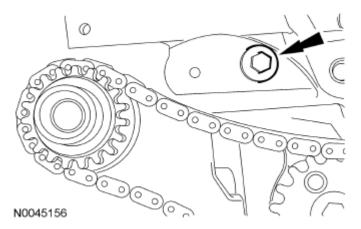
Locating Oil Pump Chain Drive Tensioner Shoulder Bolt Courtesy of FORD MOTOR CO.
